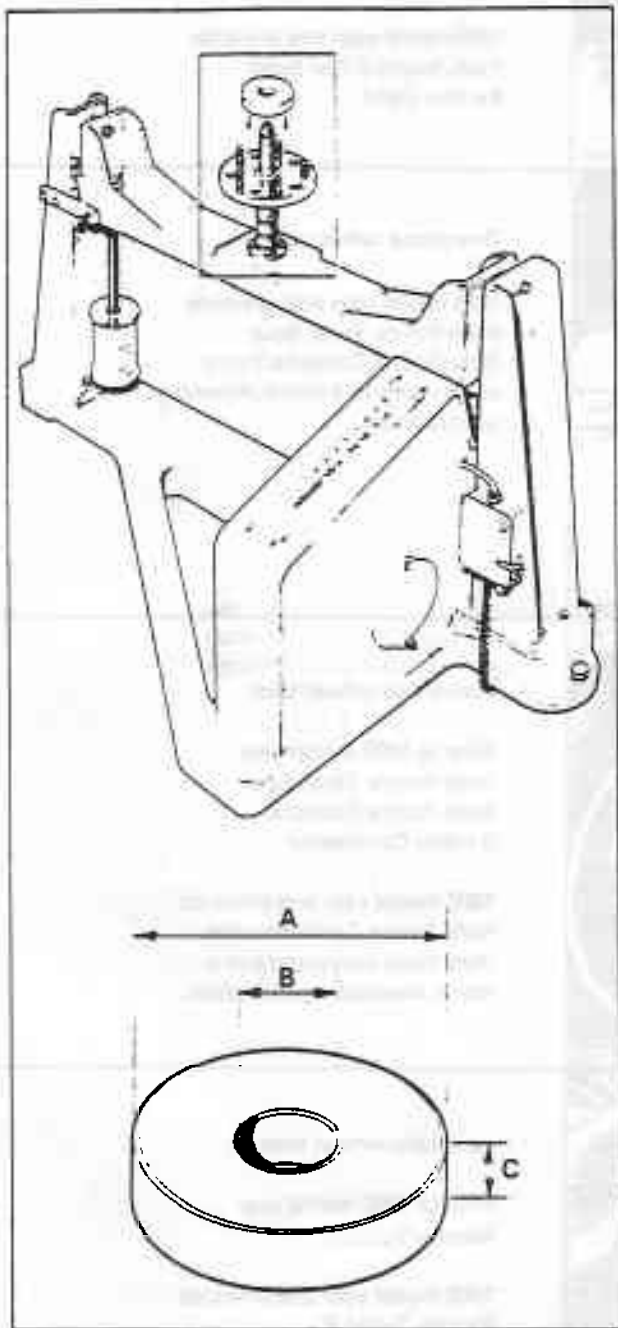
Horizontal type of balancing machine with adapter for spigotted wheels
